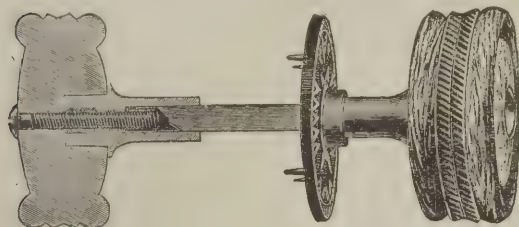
Surface Ornamenting Machine, Built by J. A. Fay & Co., Cincinnati.
